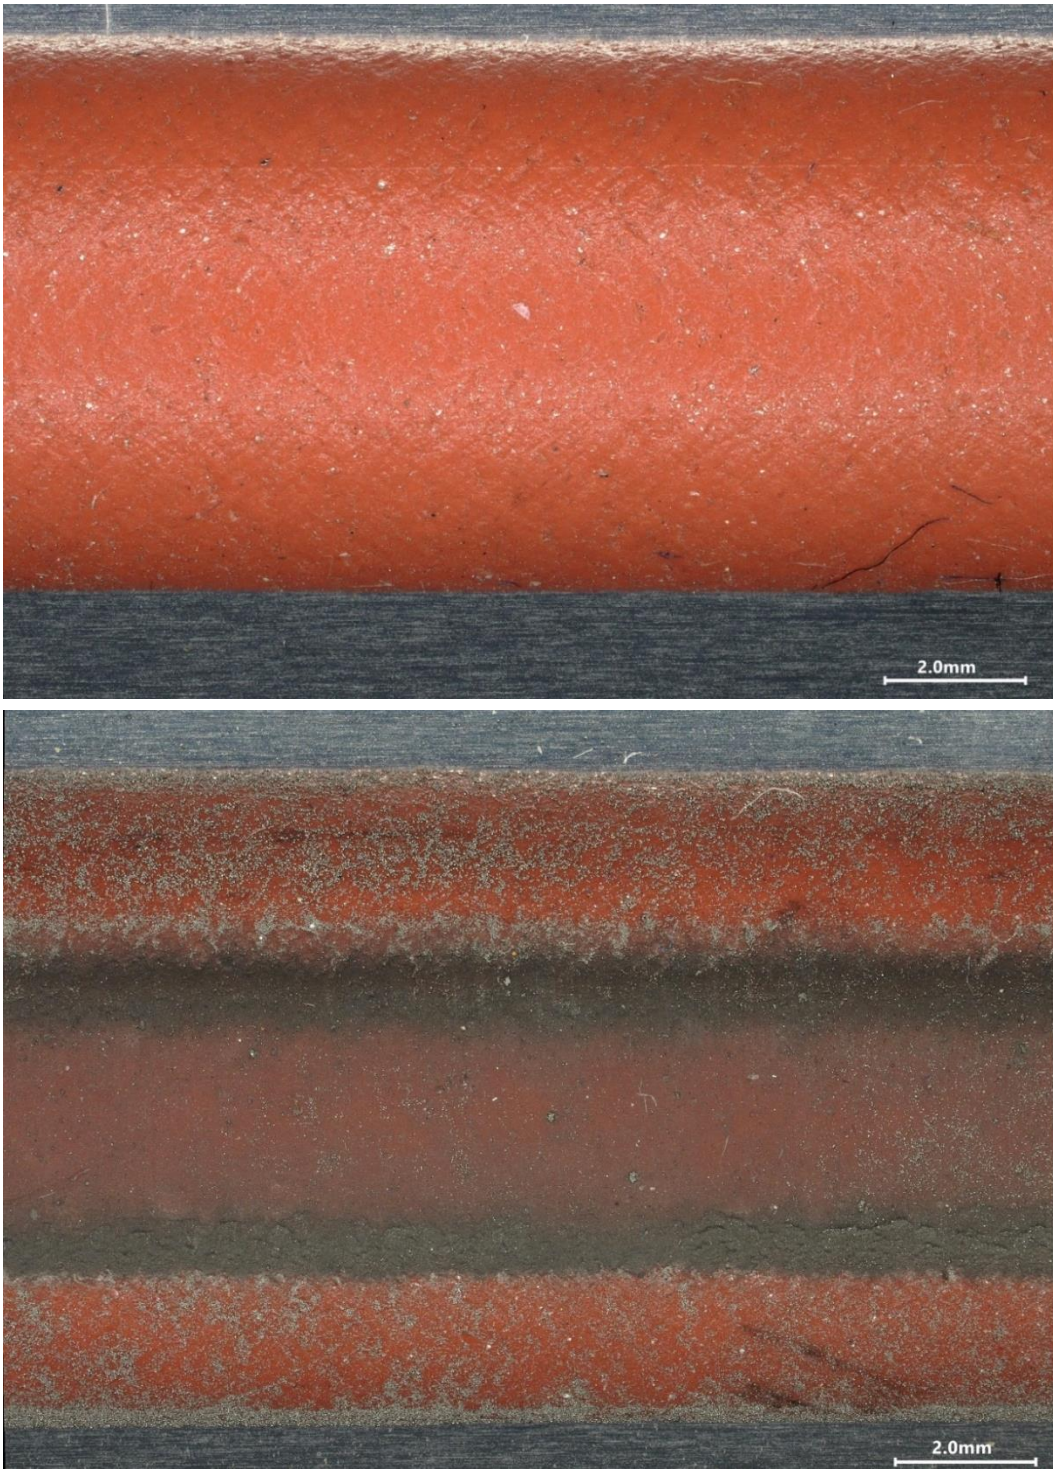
Recoater arm no. 2 before (top) and after (bottom) the print
